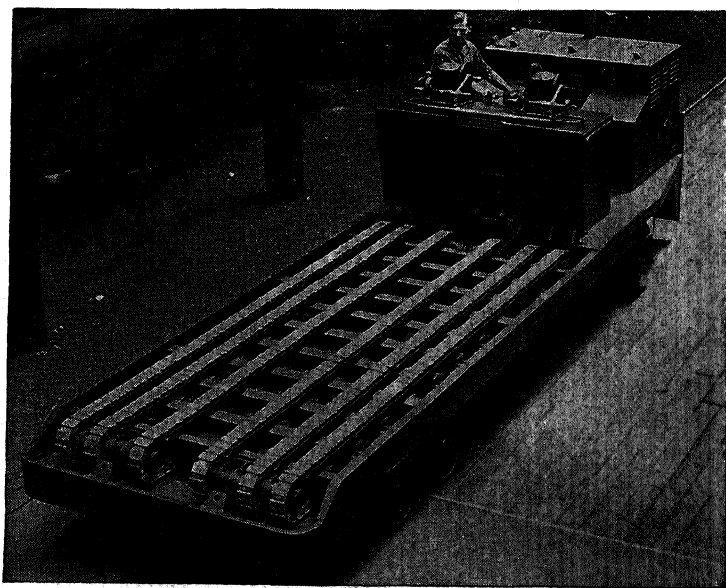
One of the largest industrial trucks ever built of welded steel construction. Capacity 40,000 lbs. Length 250", width 76". Built with standard structural shapes and plate, providing exceptional strength and rigidity with minimum weight.
